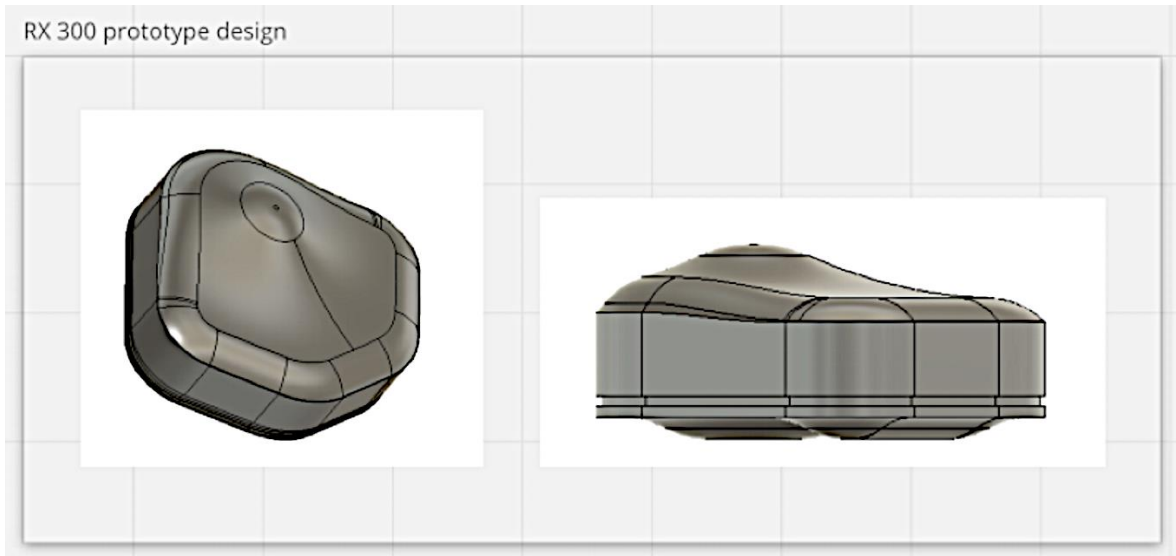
RX300 Prototype Design 1 – brutalist design with protruding bumps on bottom for better contact
